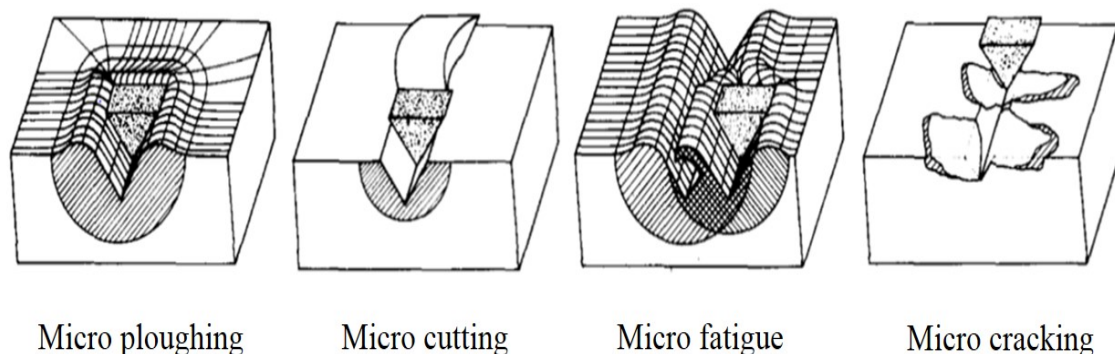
Surface wears generated from abrasive machining processes [54].
